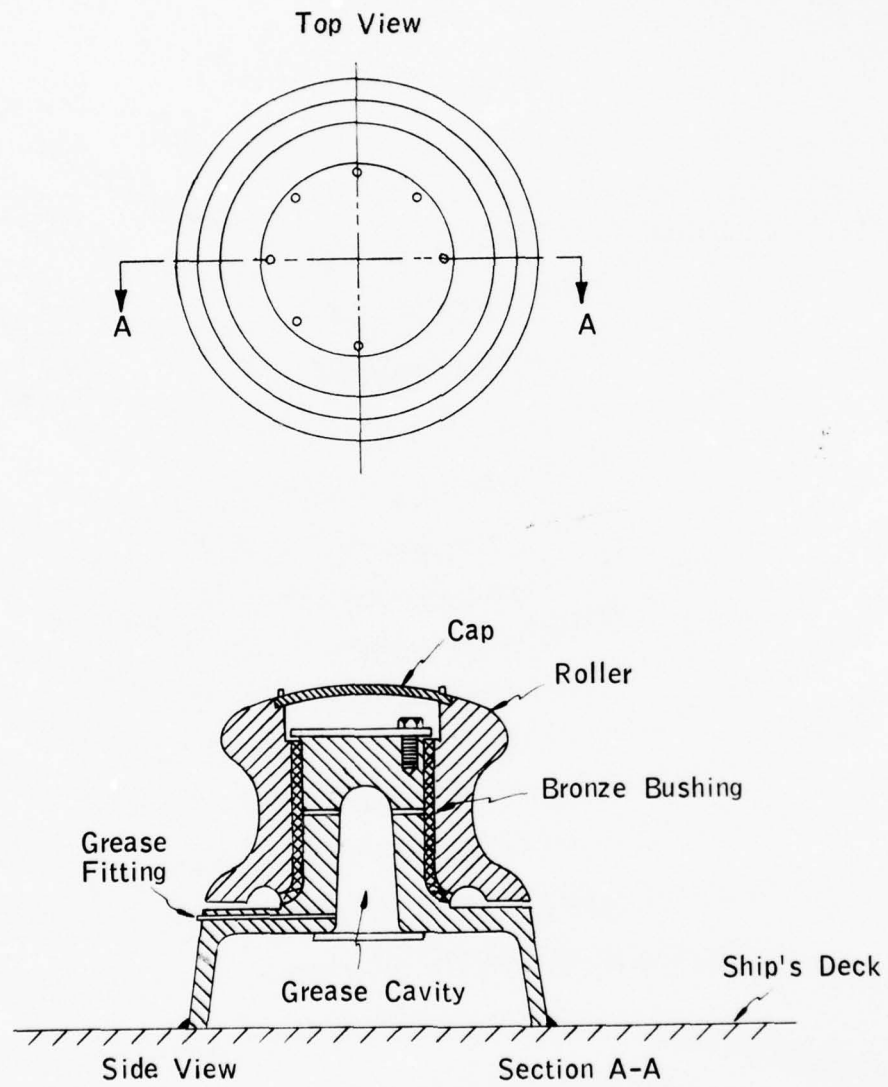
TYPICAL ROLLER FAIRLEAD
